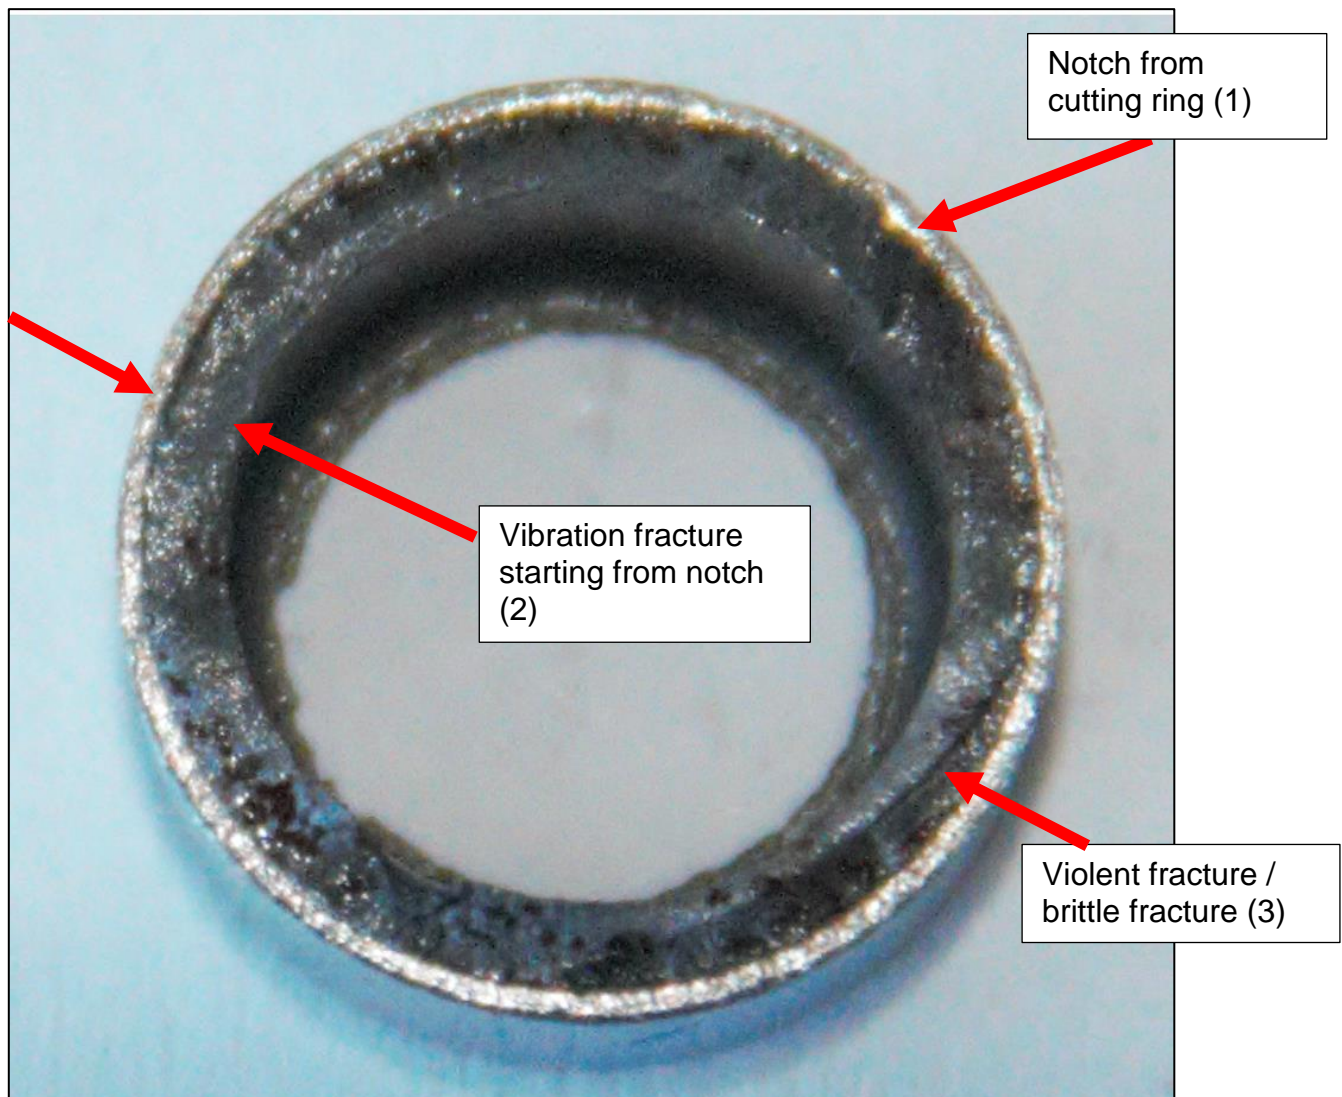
Pipe segment, notch from cutting ring outside and inner fracture surface
